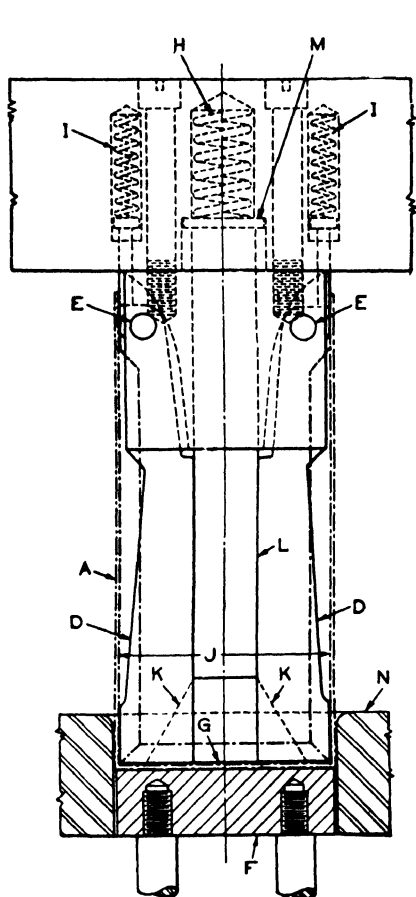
Die with an expansion punch *D* for bending the deep U-shaped frame *A*. The work material is 0.0375-in.-gage cold-rolled steel.
